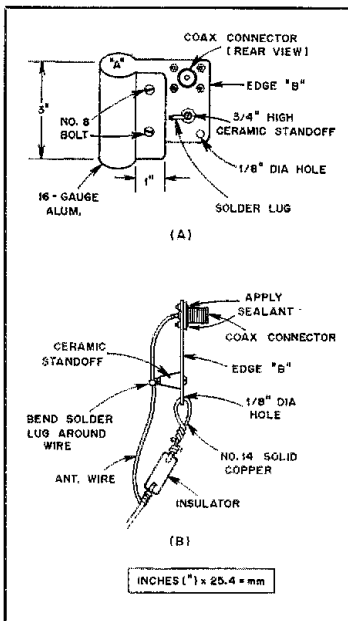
Details of the homemade clamp/bracket used for the W1FB half-sloper antenna (A). An edge view of the assembly is shown at B to illustrate how the standoff insulator is mounted. The coax connector should be coated with sealant to prevent oxidation between it and the aluminum bracket. Inches x 25.4 = mm.
